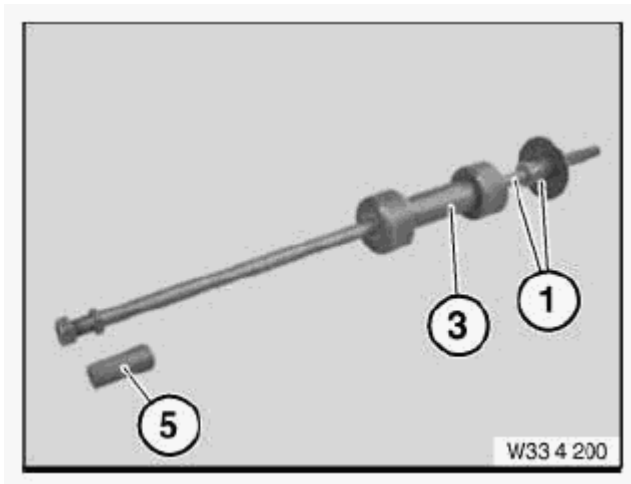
Tool Kit / Striker Fixture (33 4 200)
